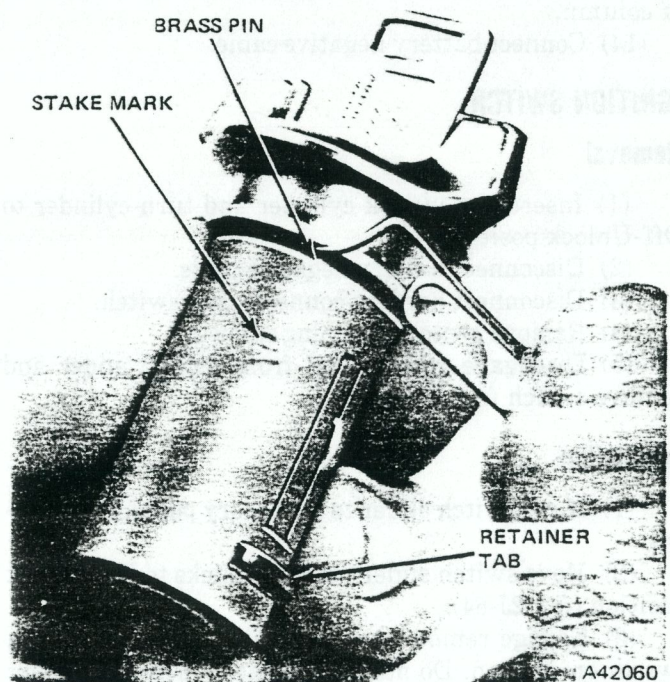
J-65 Compressing Lock Cylinder Plunger Pin
